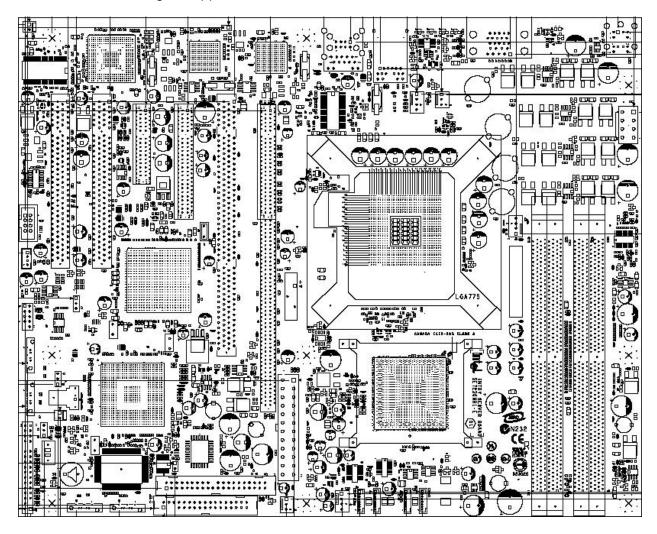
Intel® Server Board S3200SH Mechanical Drawing
